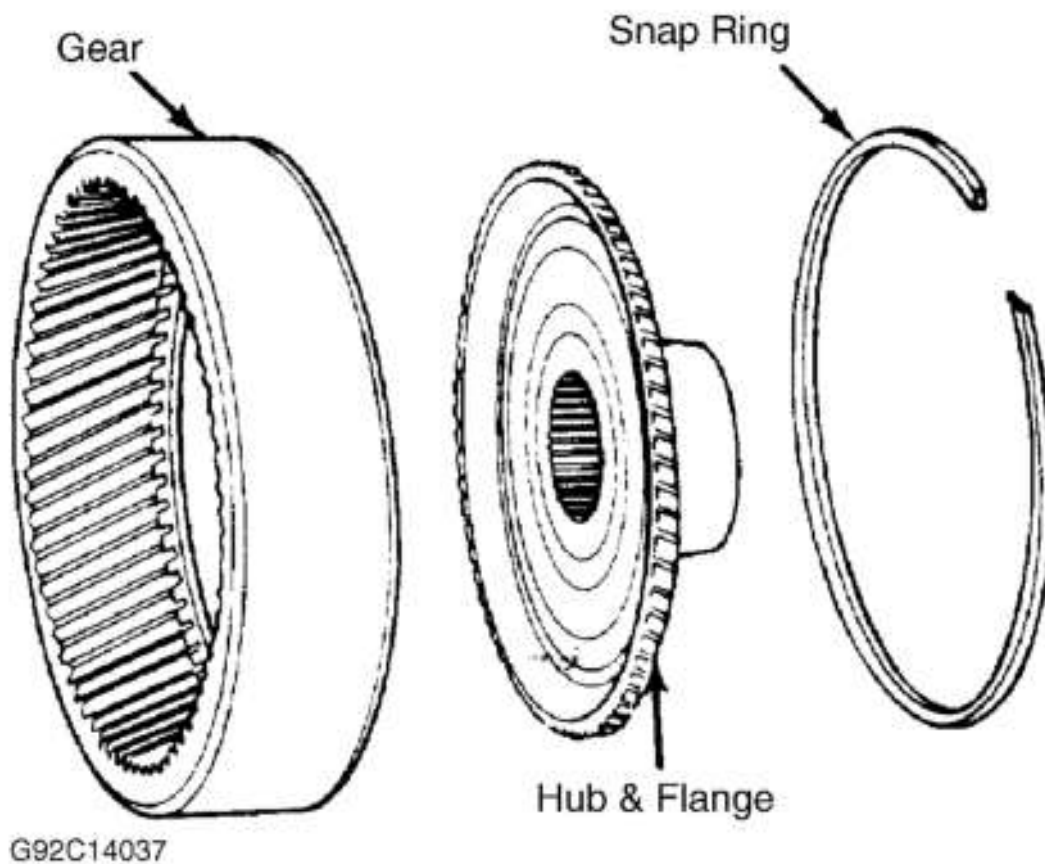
Identifying Output Shaft Hub & Ring Gear Assembly
